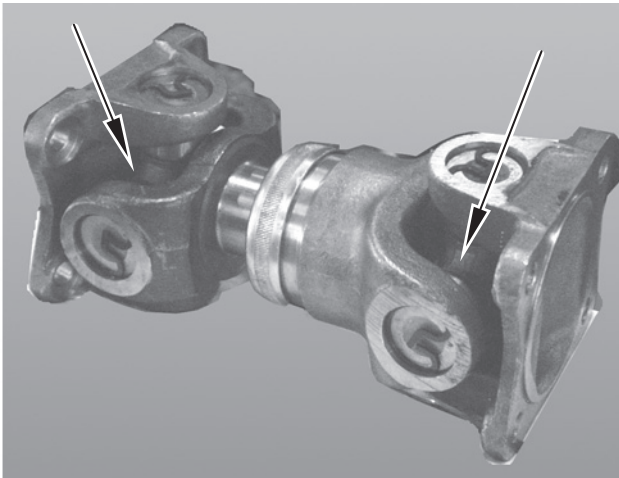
Drive Shaft Universal Joint Grease Fittings
